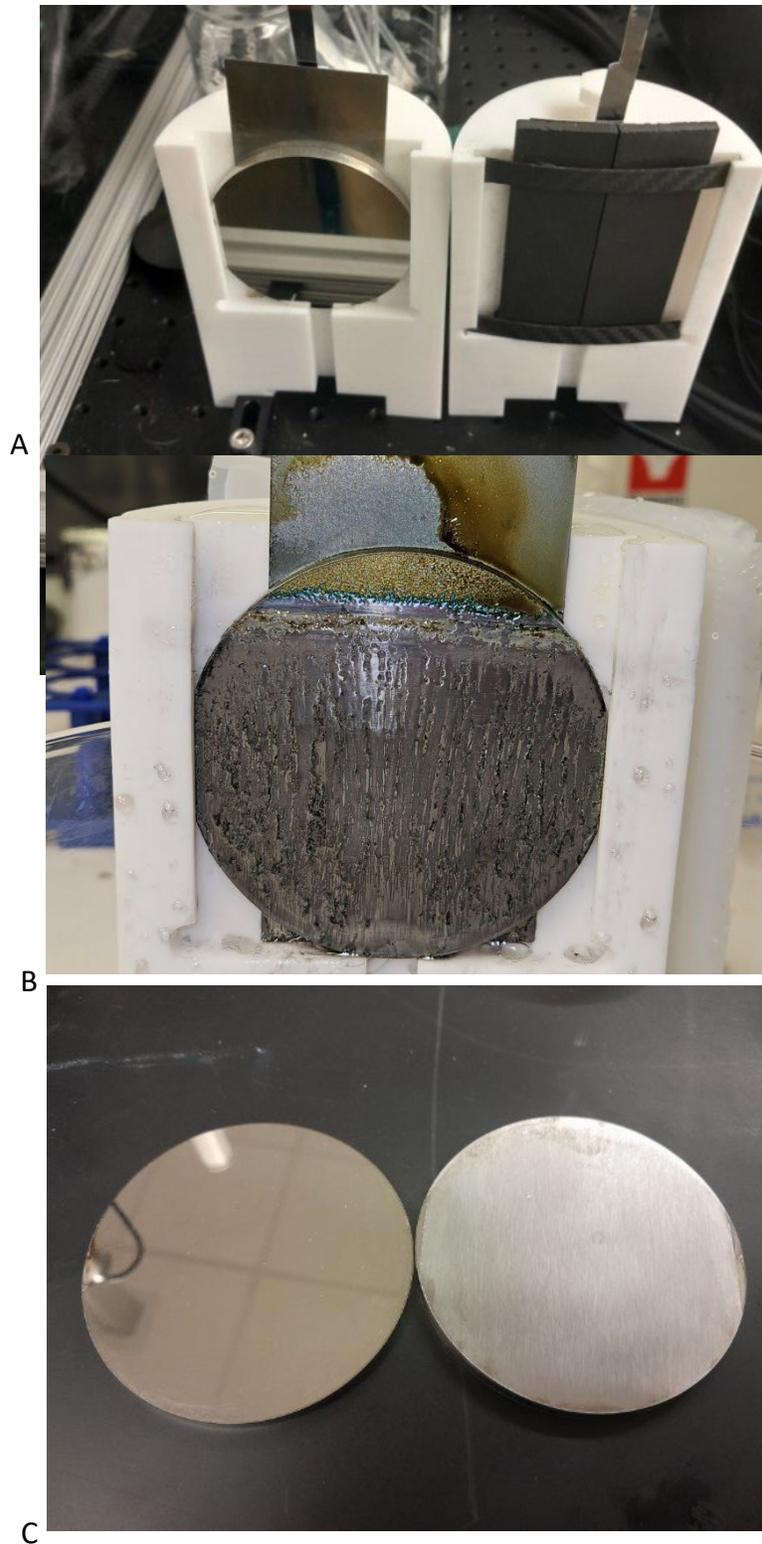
A) The demonstration piece and counter electrode. B) The plated workpiece prior to cleaning in ethanol and sonication. C) The original finish (left) and a coating of 35 μm of titanium (right).
